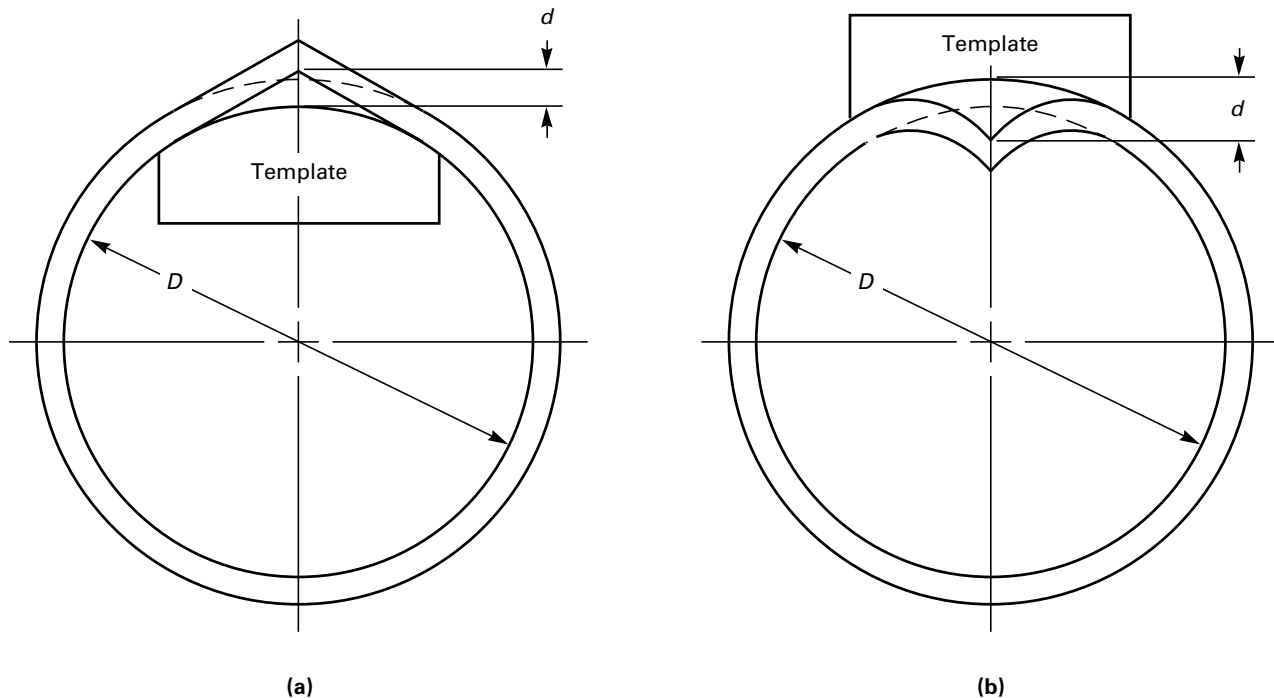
PEAKING HEIGHT AT CATEGORY A WELD JOINTS
